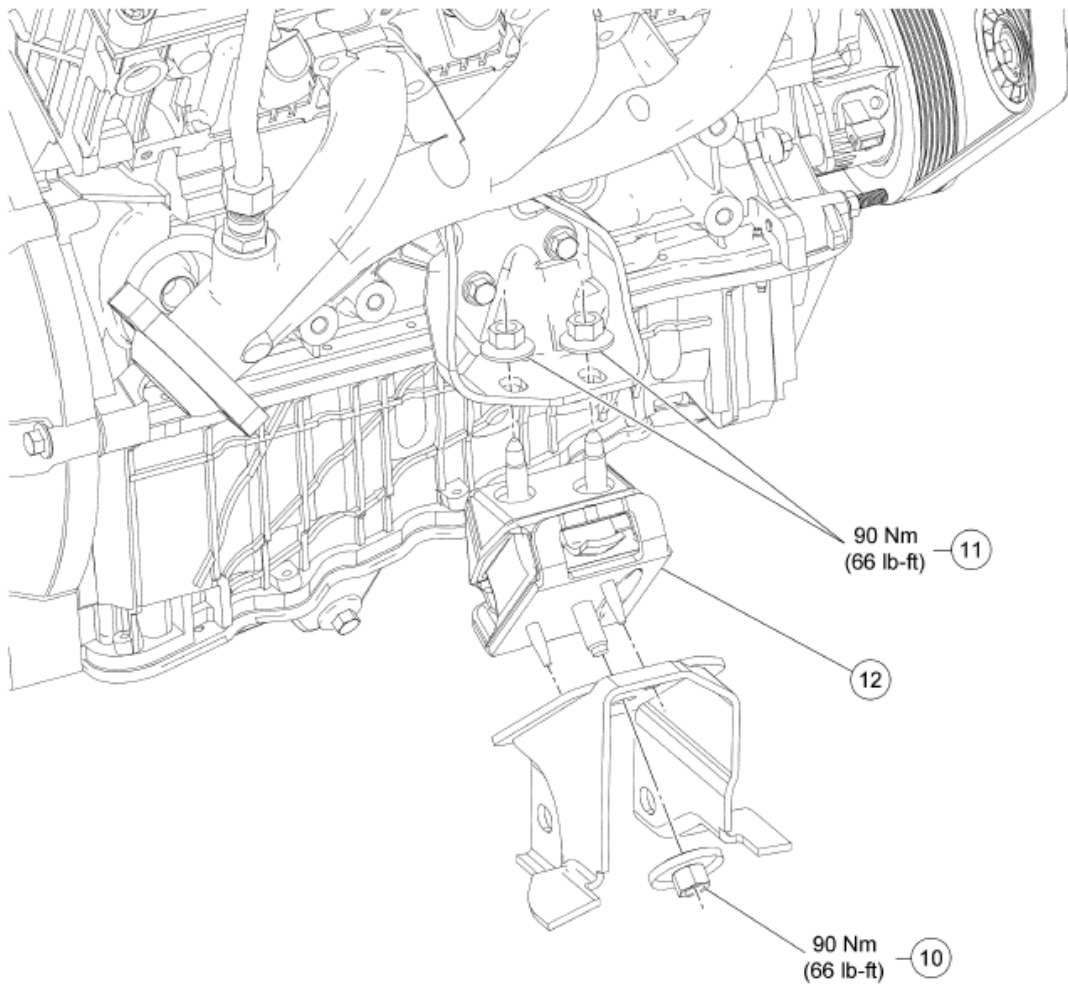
Identifying Engine Support Insulators - Four Wheel Drive
